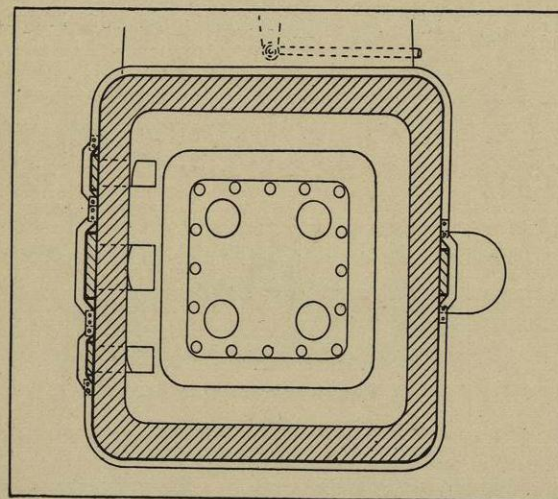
Plan of latest 8-ton Girod Furnace.
